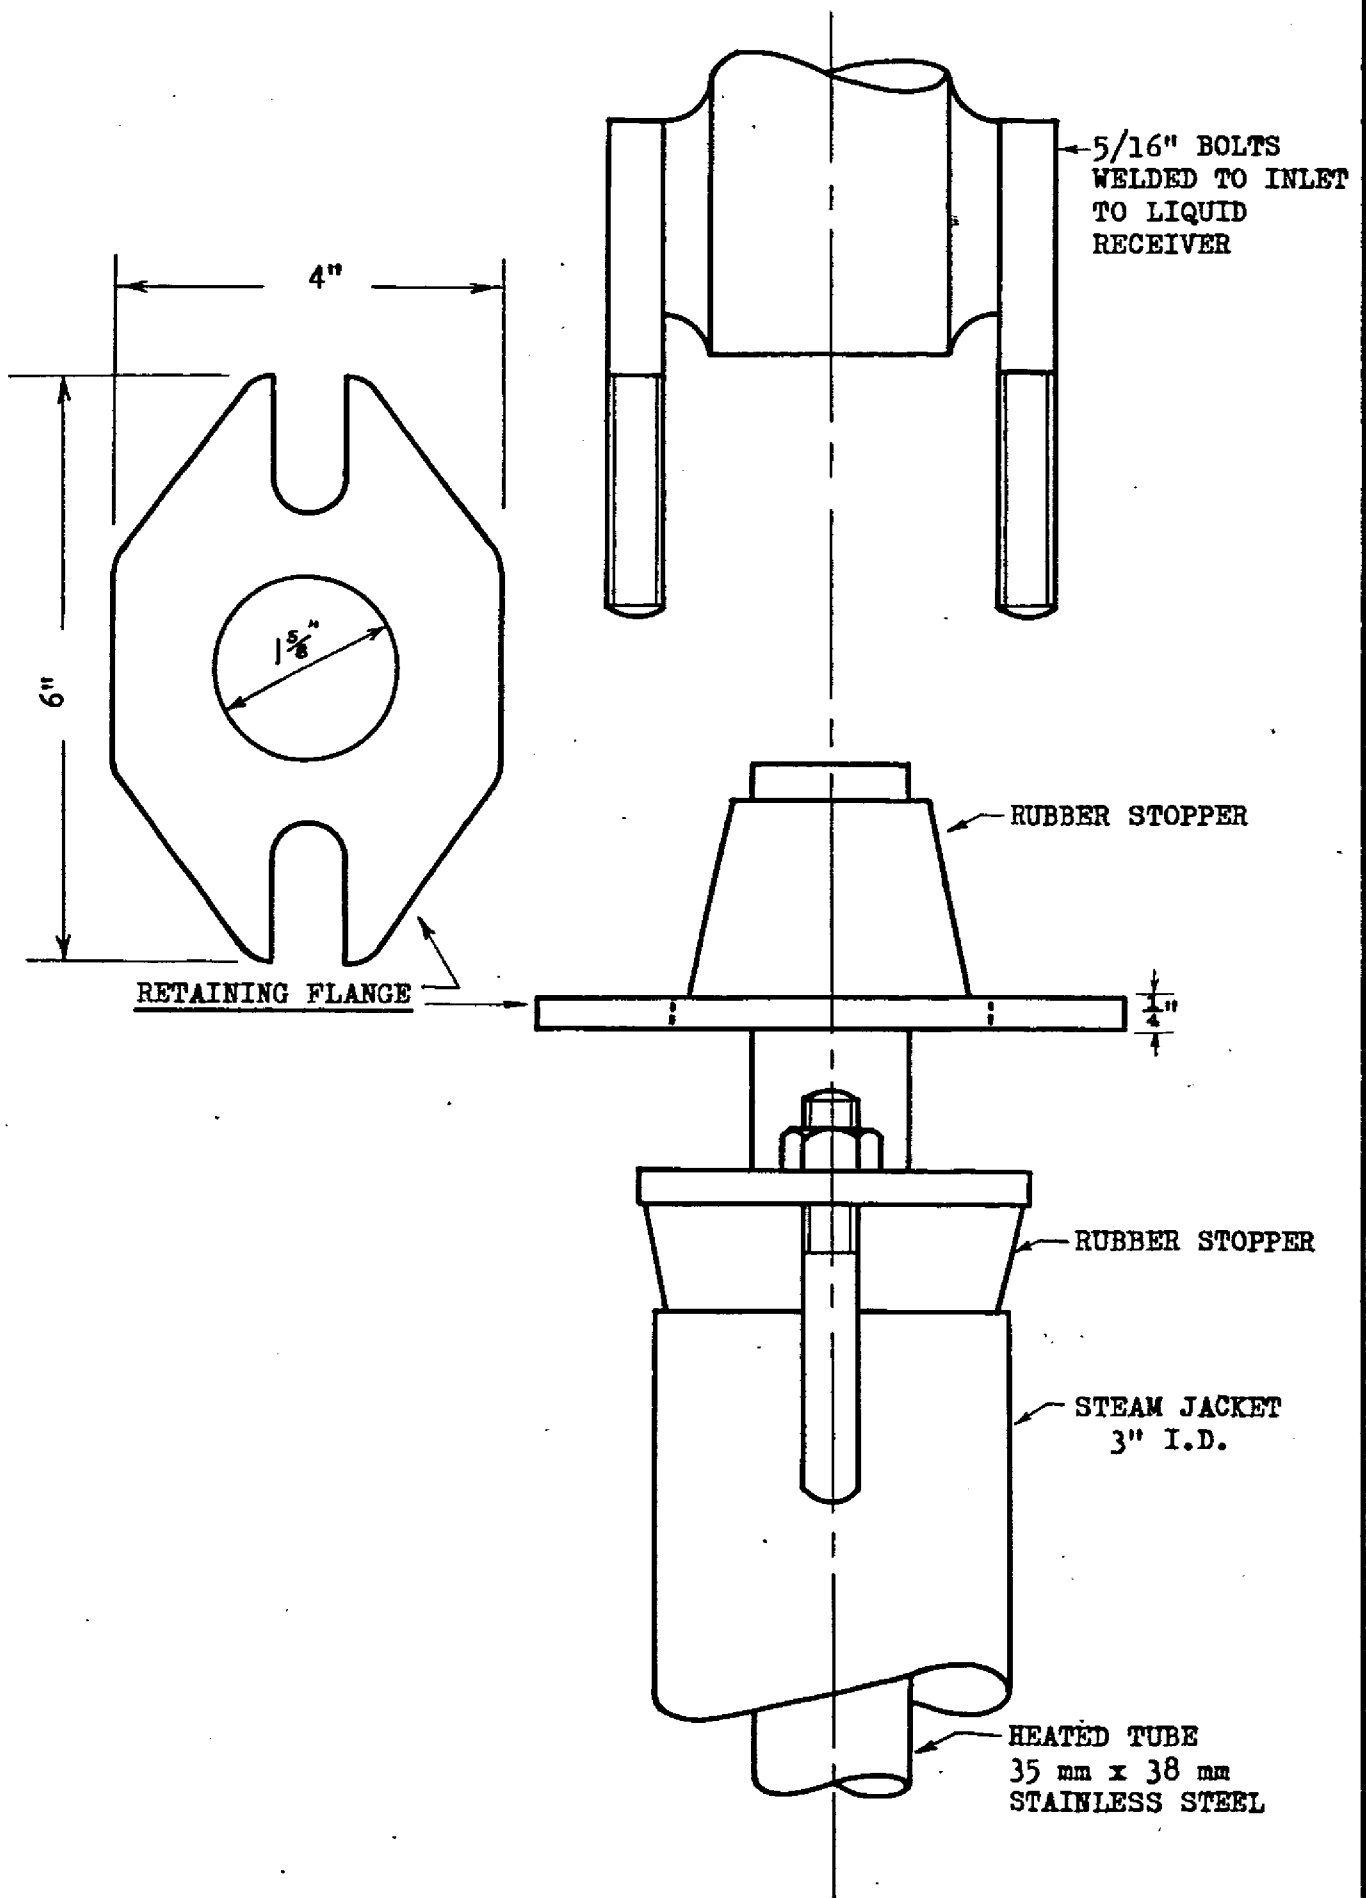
ORIGINAL TUBE AND JACKET ASSEMBLY
